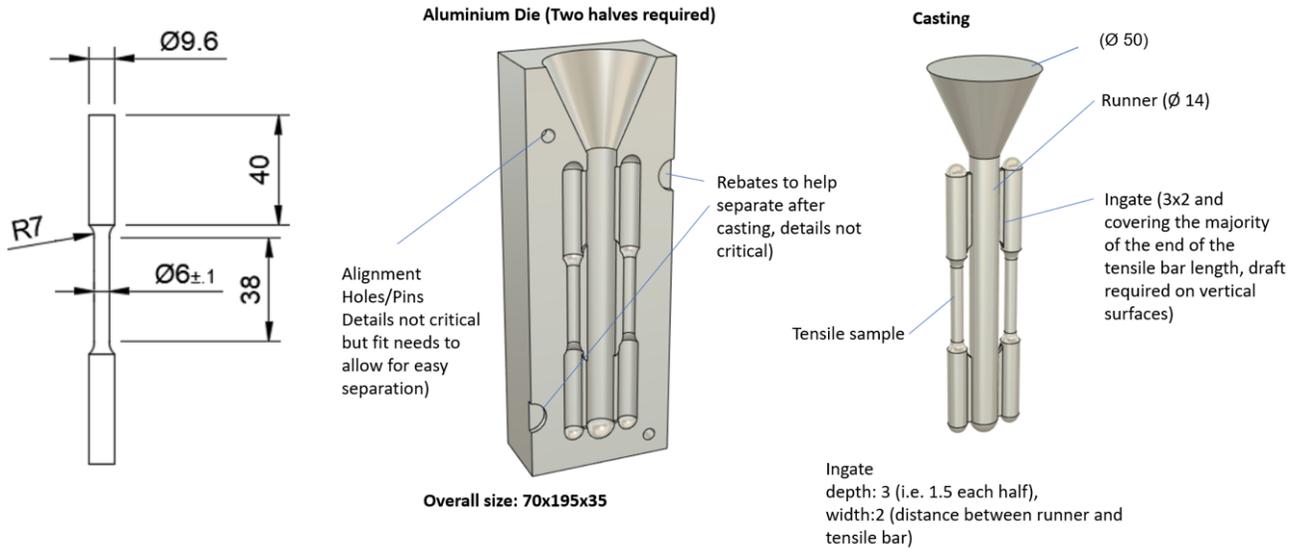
Tensile test piece dimensions, mould and casting from which the test pieces were recovered
